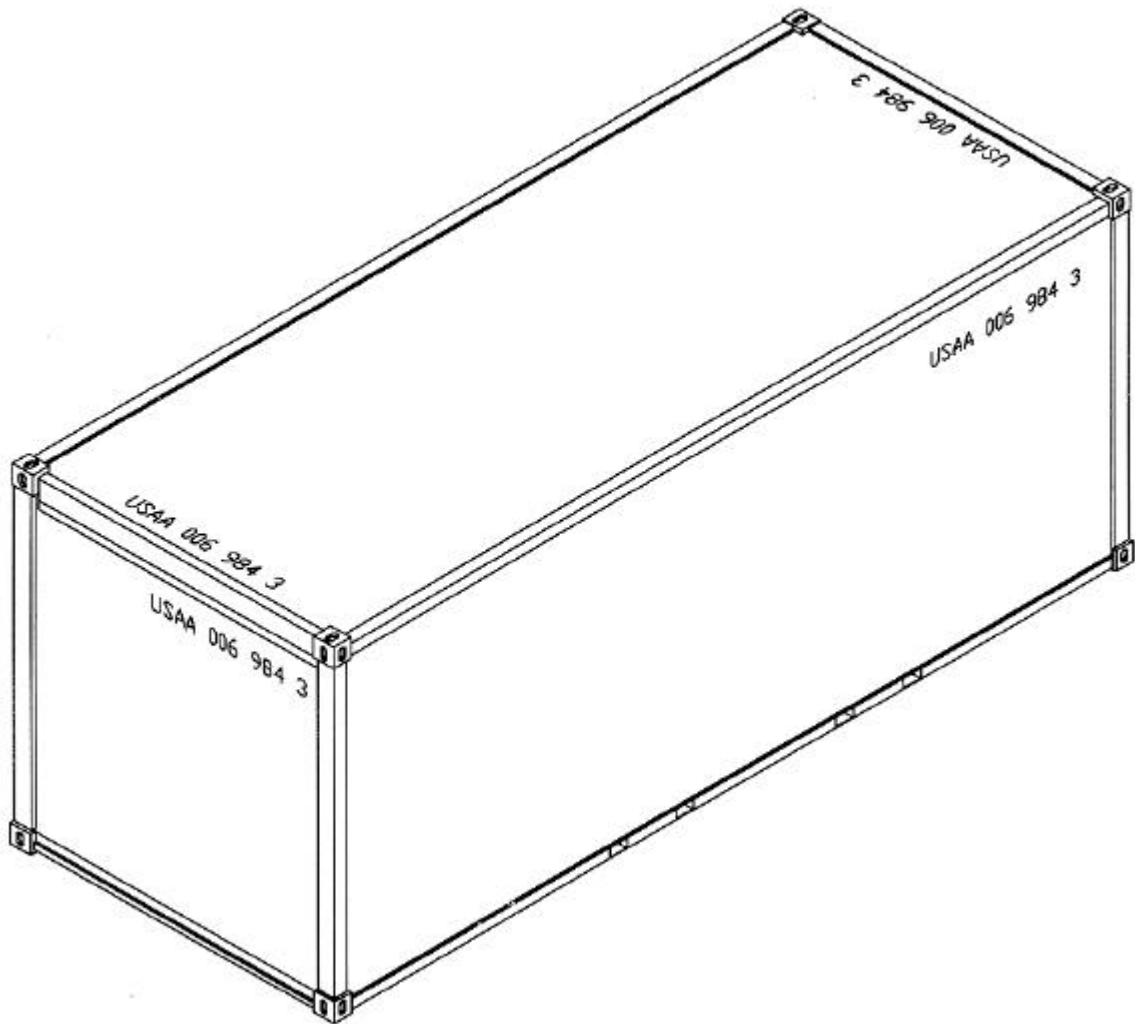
Typical Horizontal Layout of ISO Identification Markings
